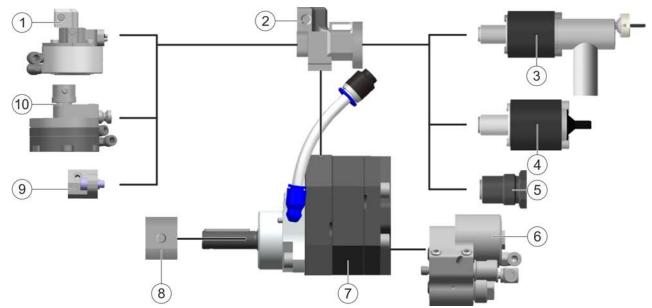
Possible assemblies EcoPump9 purge-optimized
